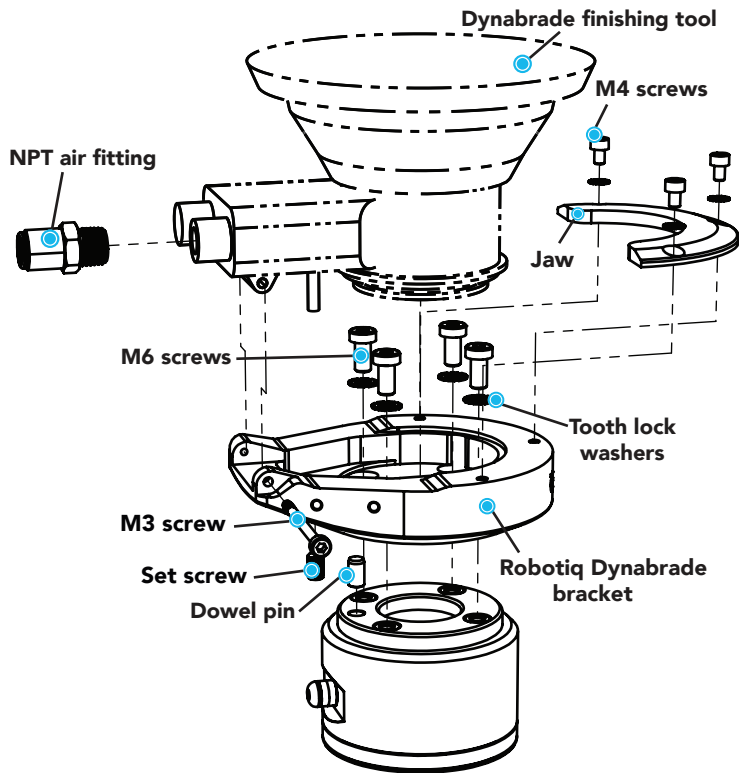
Surface Finishing Kit and Sanding Kit with Dynabrade finishing tool on e-Series Universal Robots
